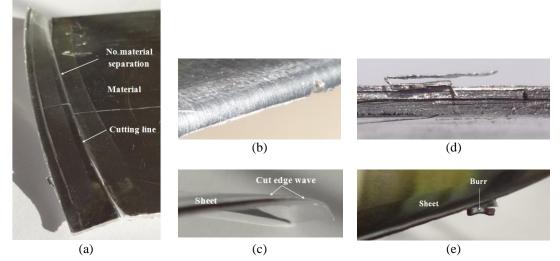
Defects of cut edge of aluminum alloys: (a) no material separation, (b) edge rounding, (c) edge wave, (d) chip and (e) burr
